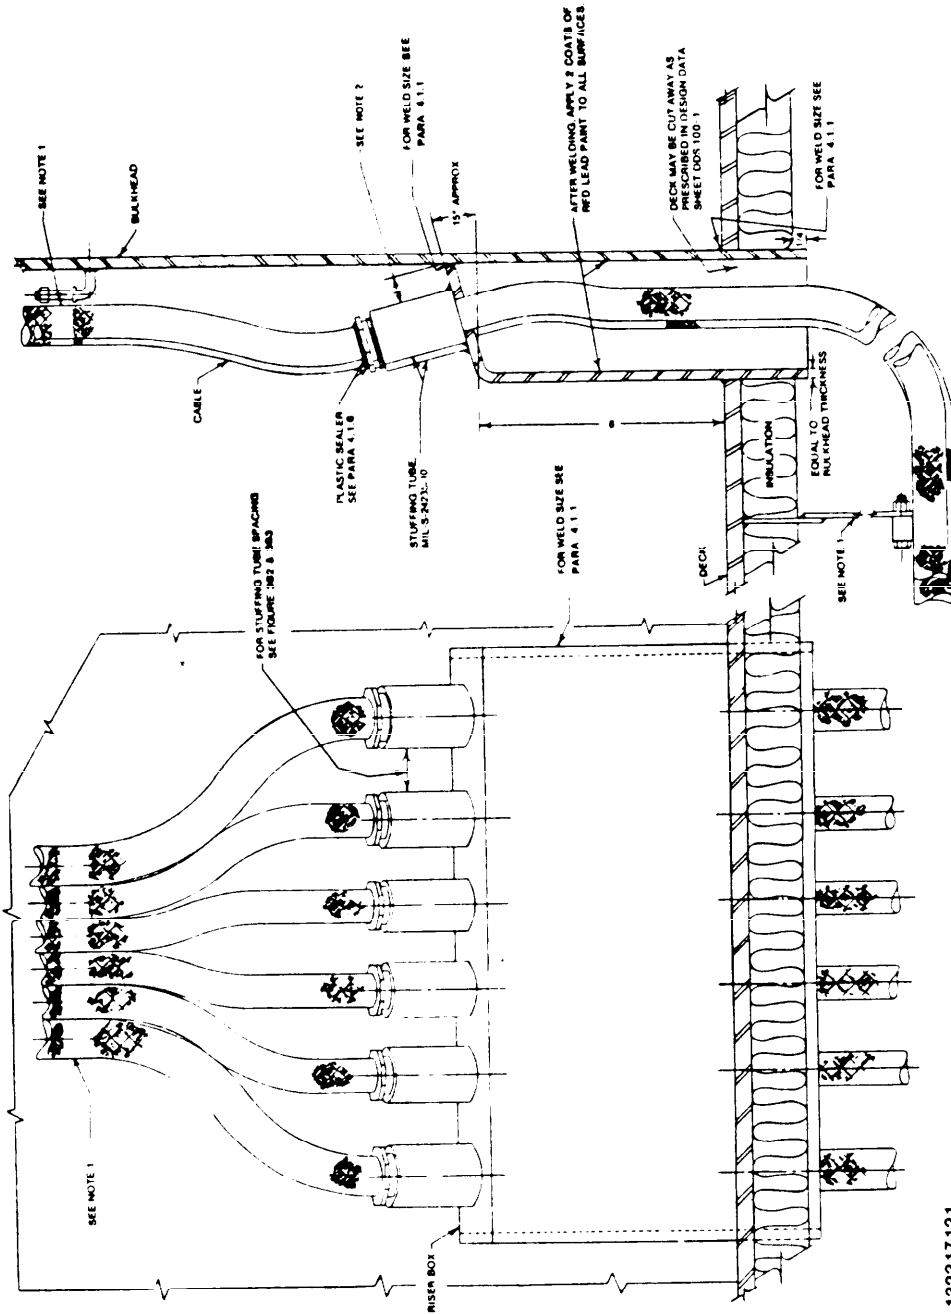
B20. Topside stuffing tubes with riser box (surface ships).
